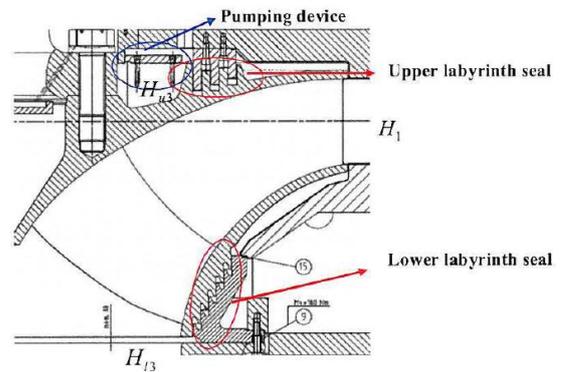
Schematic view of upper and lower labyrinth seals for high head Francis turbine. [12].
